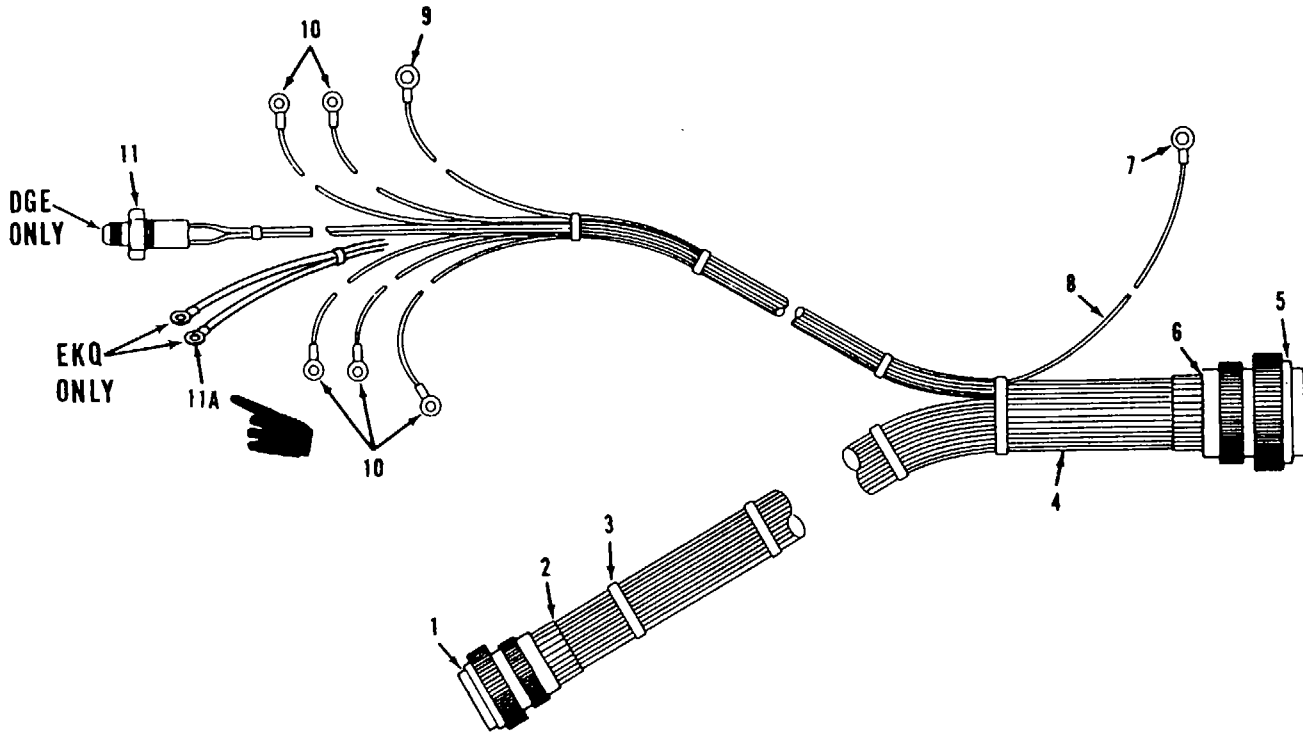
Wiring Harness, 1320E6709 and 1322E7230
